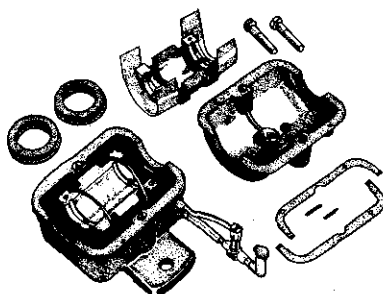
Disassembled View of Self-aligning Ring Oiling Bearing
